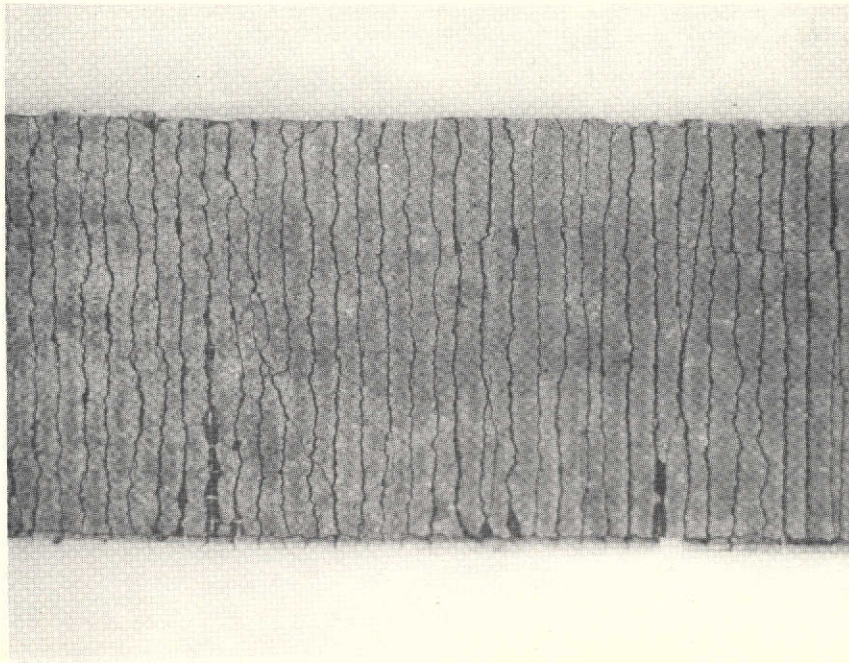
Type E Positive Plate - Bend Test Specimens 3X
